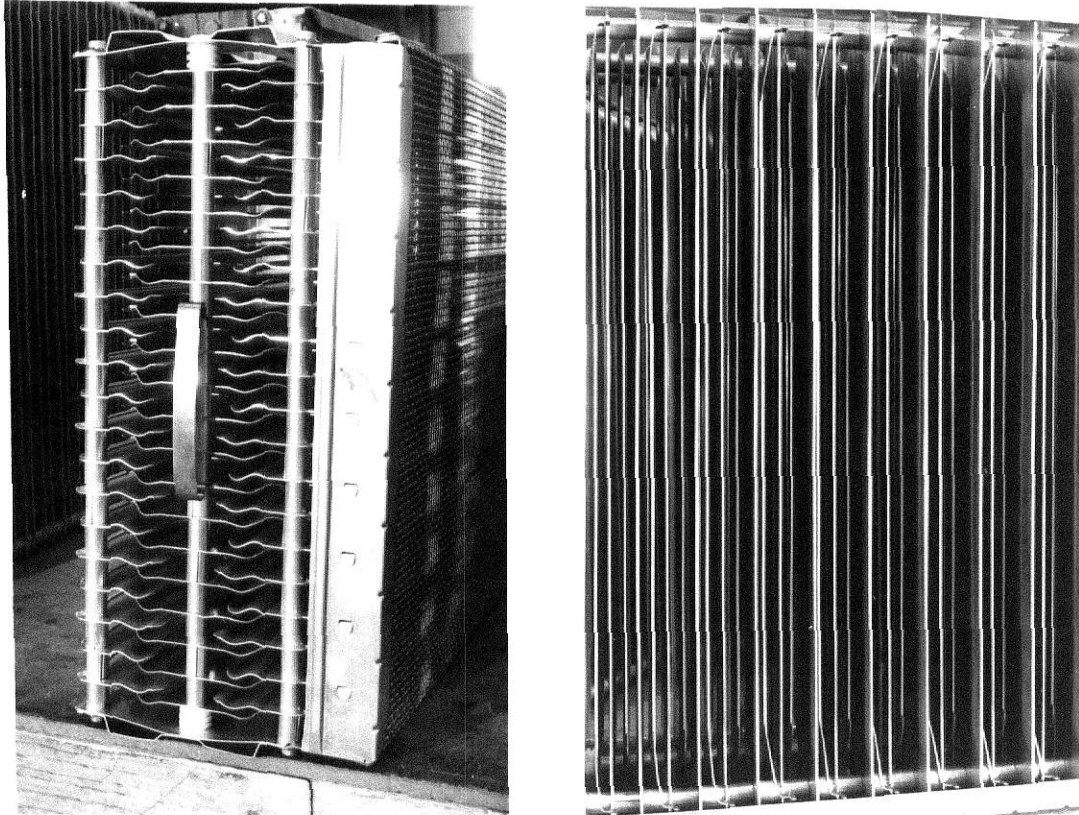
Photographs of the side view and front view of Metal-Fab cell.
